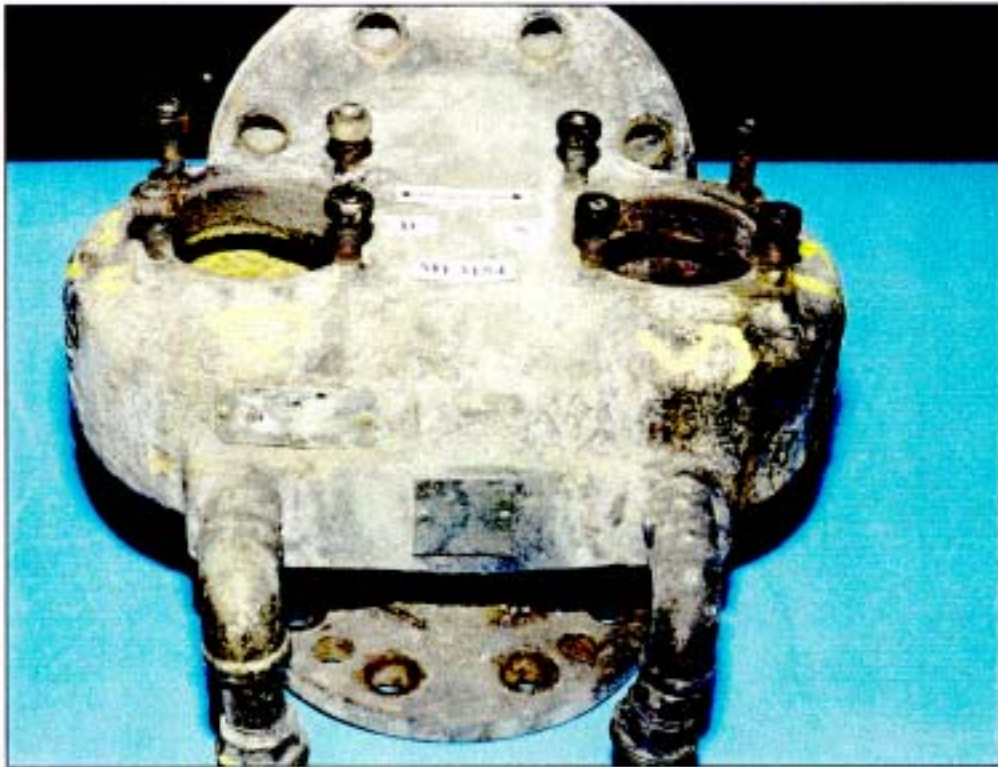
Valve body showing repairers plate top left, makers plate bottom right and redrilled boiler mounting flange
